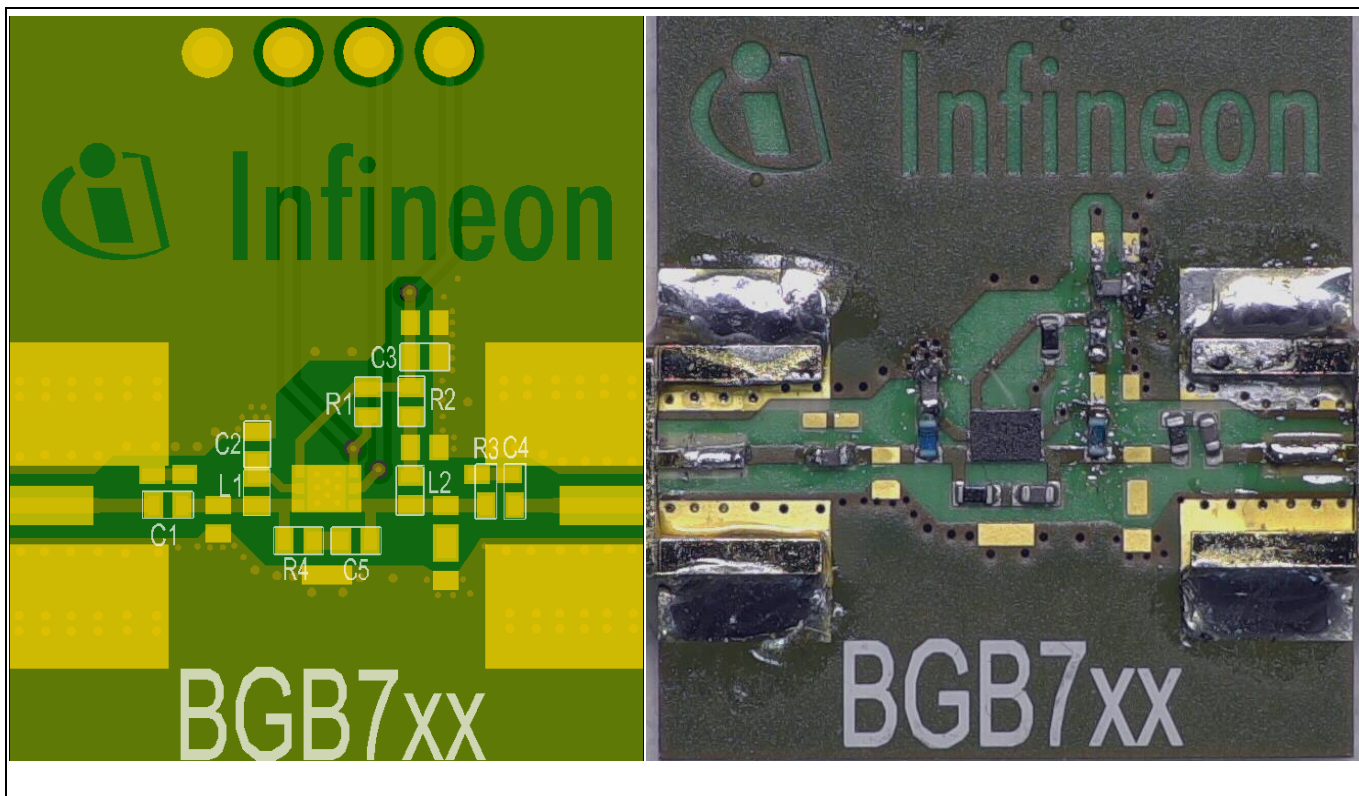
PCB layout with PCB marking M141017 (left) and photo (right)
